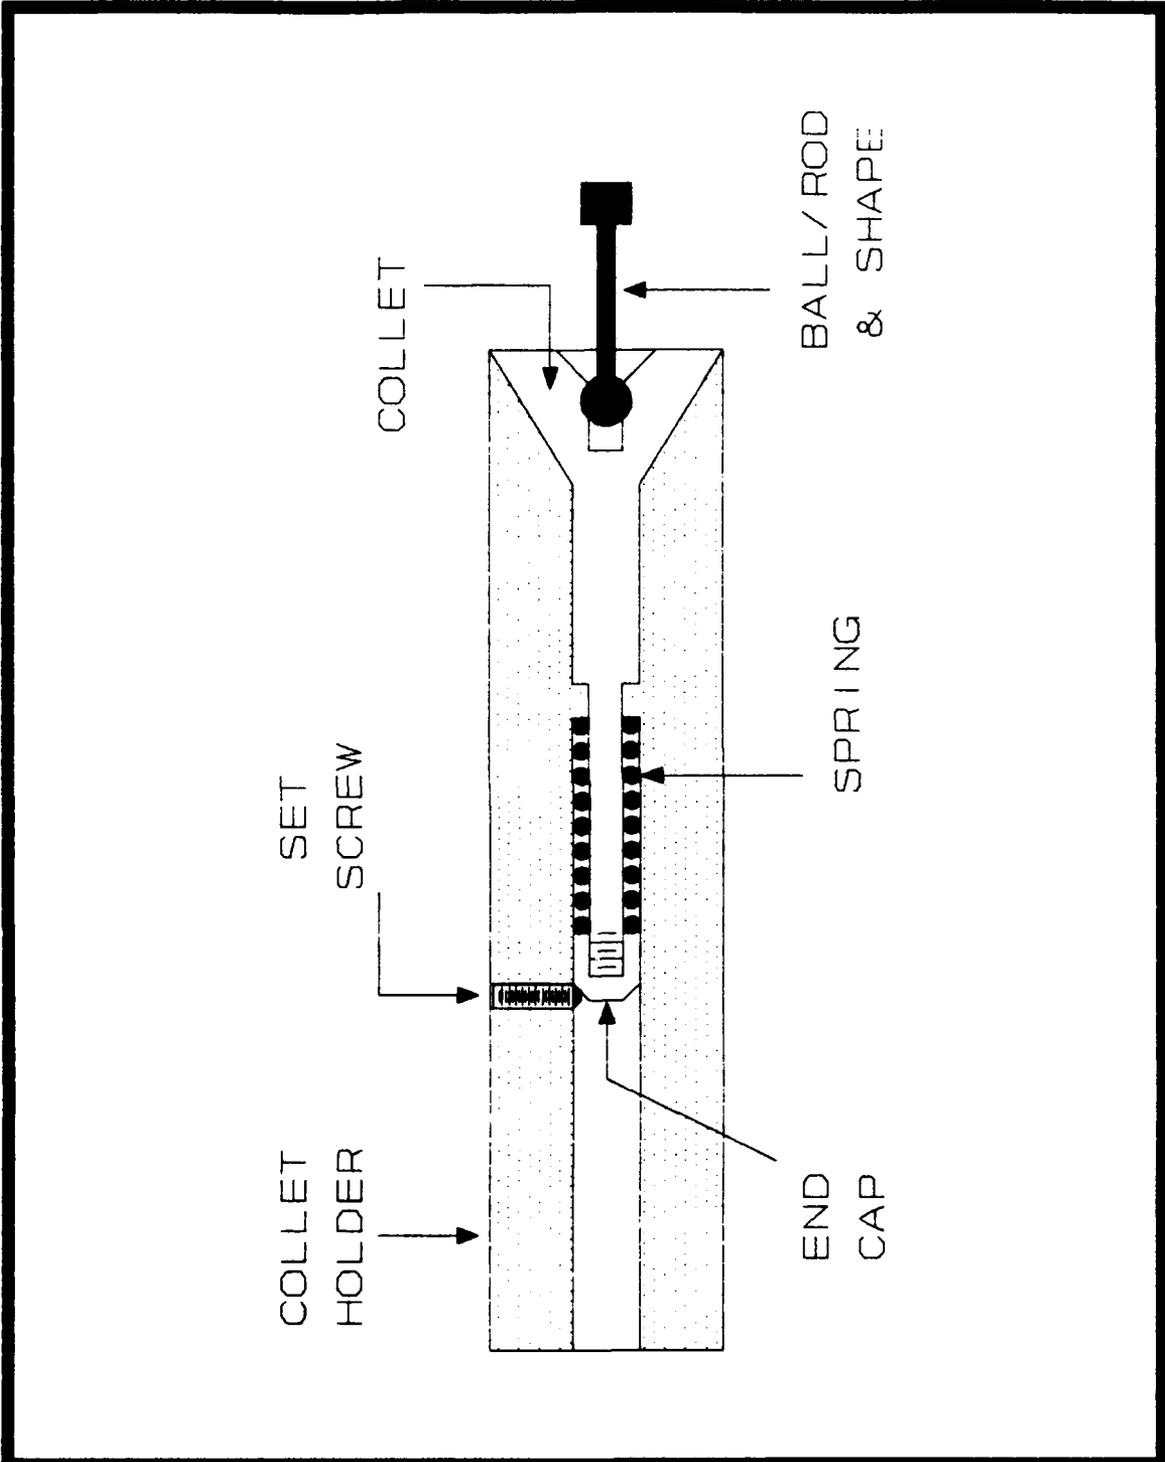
Assembly of the collet, ball/rod and shape, and collet holder.
